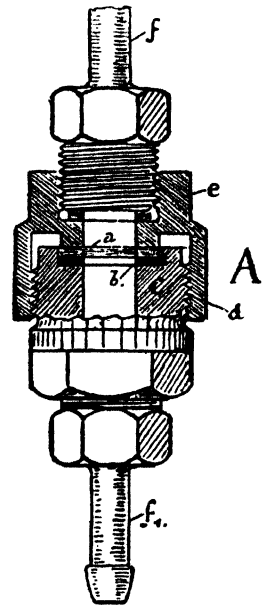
Enlarged View of A, fig. 152, showing detail.
